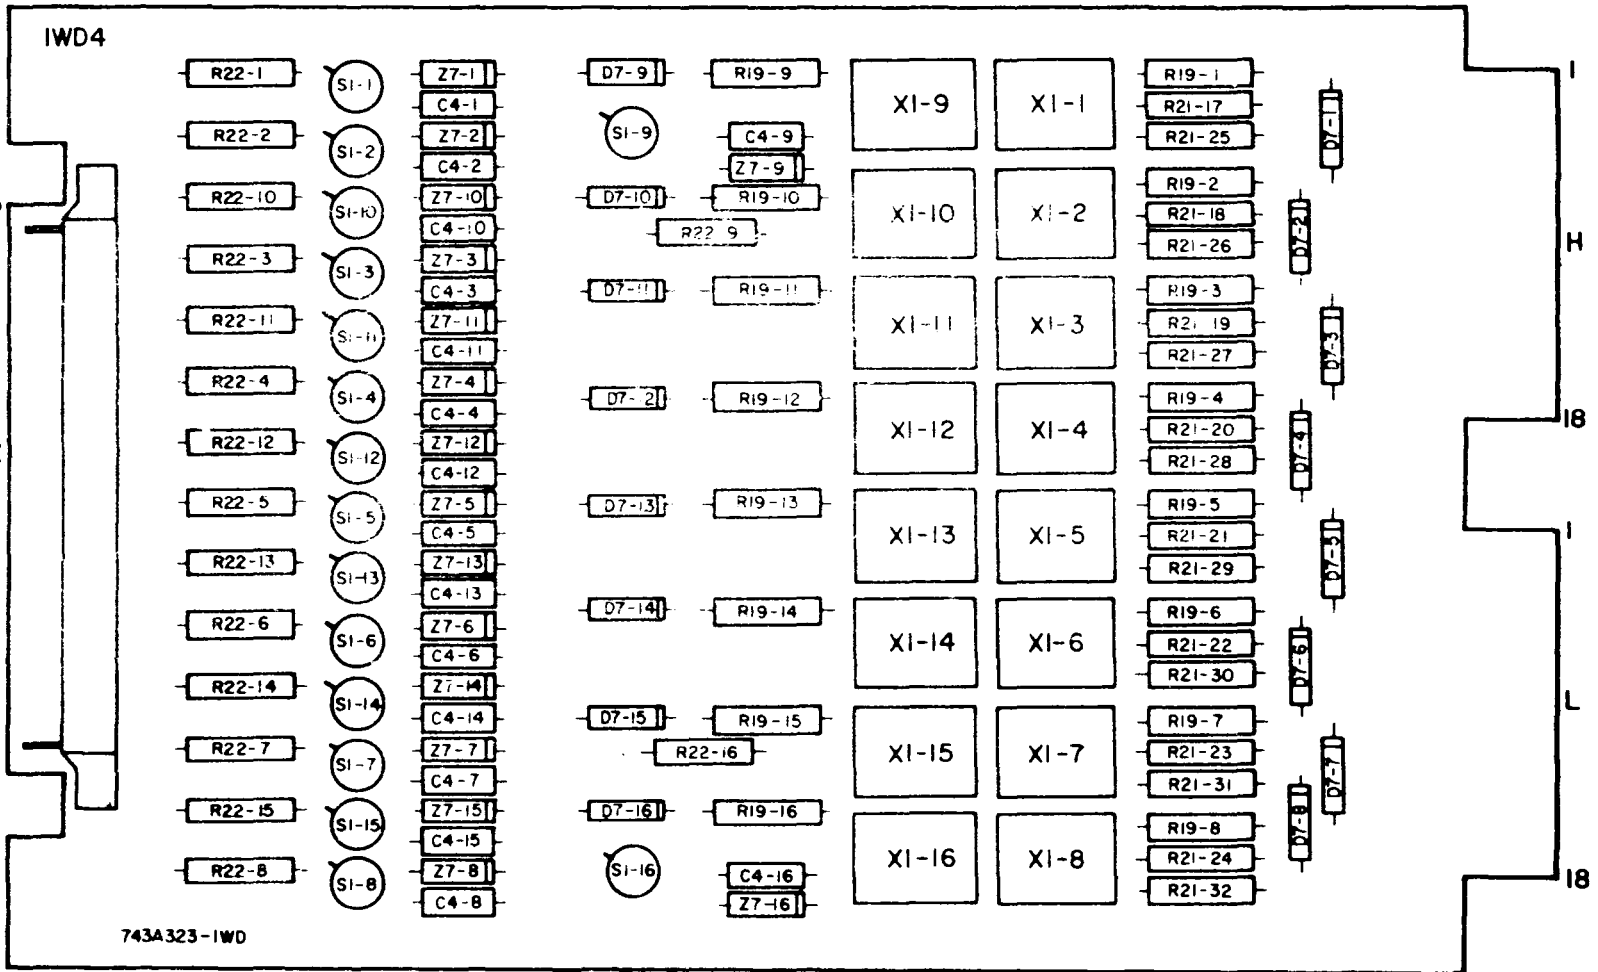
IWD4 ASSEMBLY (REF. DWG. 743A323, SUB 11)
